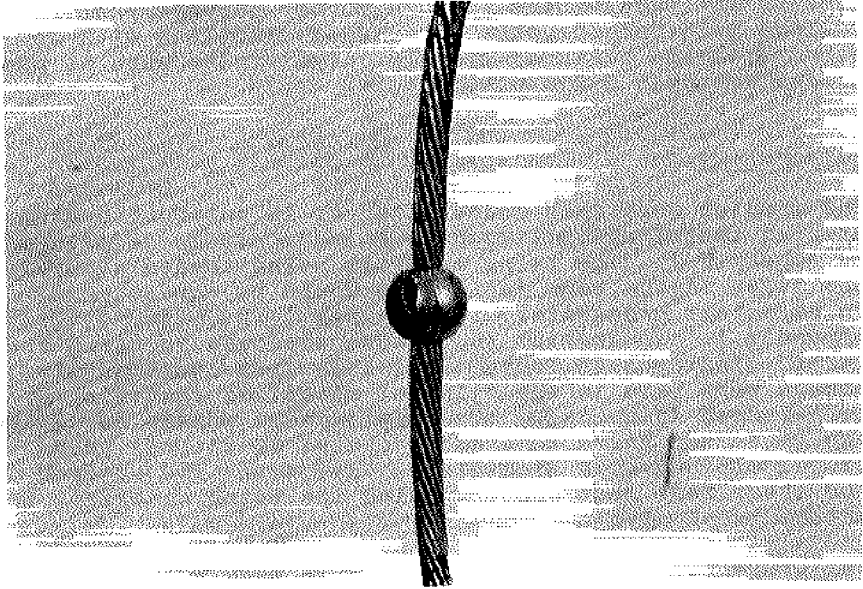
& #2. Severe corrosion on stainless steel ball swaged over stainless steel tying wire.
